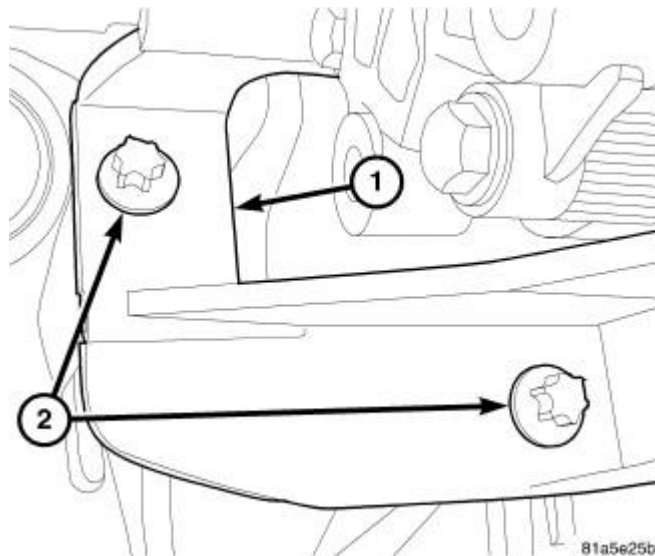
REAR PUMP MOUNTING BRACKET BOLTS - 2.7L
